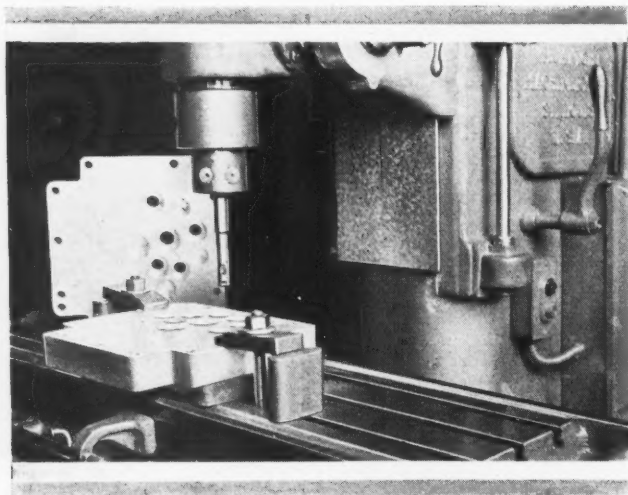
An Accurate Hole-locating and Boring Job Performed on a W. B. Knight Machinery Co.'s Milling Machine. Center-to-center Tolerance, 0.0002 Inch
